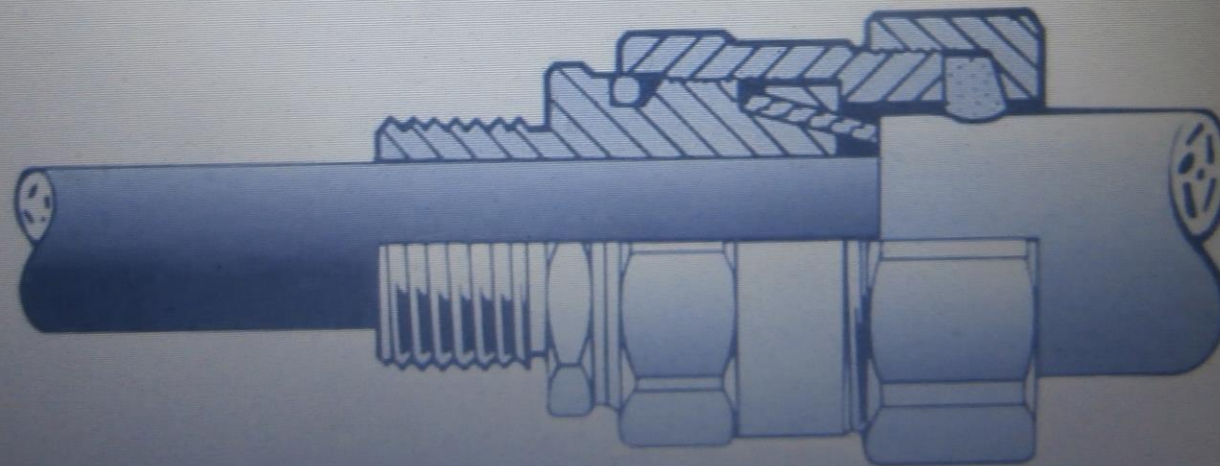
Weatherproof gland for armoured circular PVC cable OLEX CABLES
